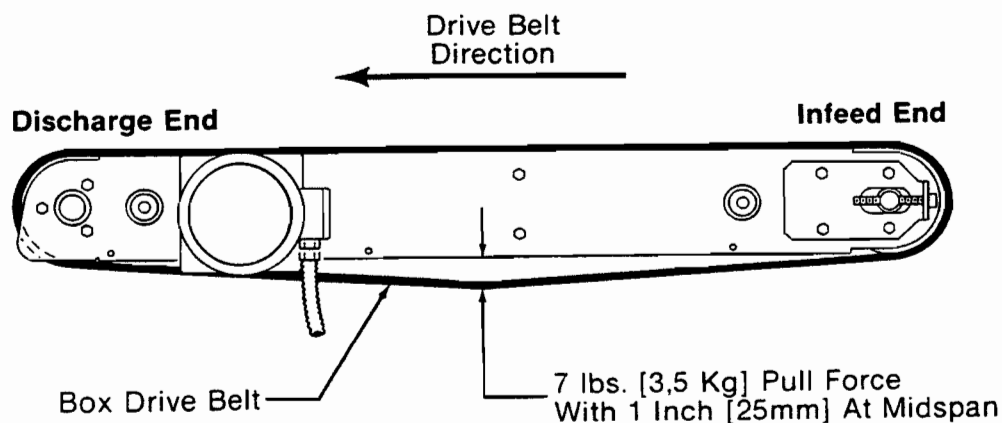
Box Drive Belt Tension Adjustment - Top View
